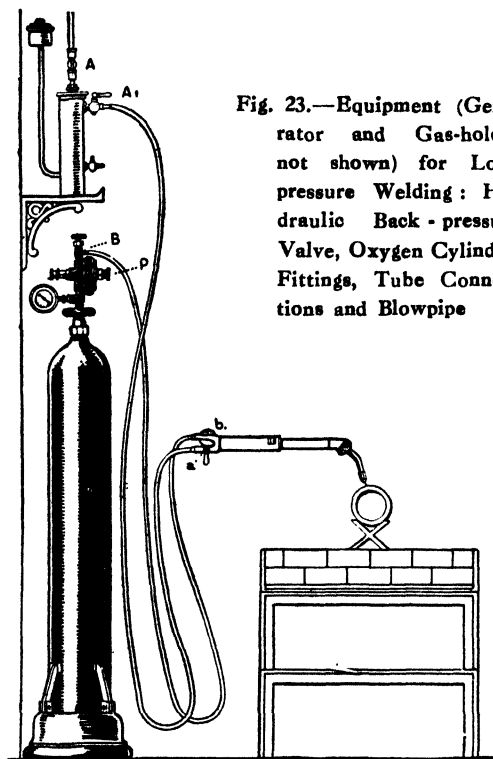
Equipment (Generator and Gas-holder not shown) for Low-pressure Welding: Hydraulic Back - pressure Valve, Oxygen Cylinder, Fittings, Tube Connections and Blowpipe
